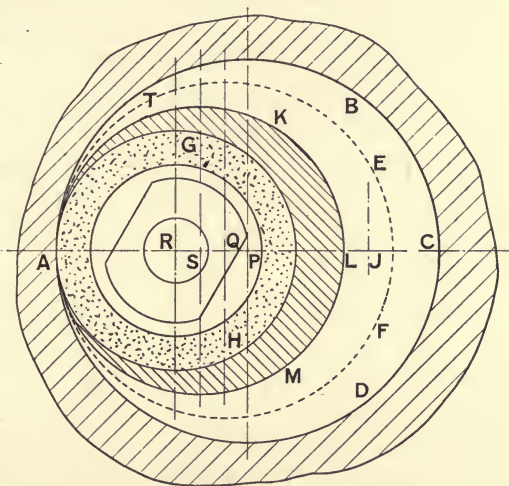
ARRANGEMENT OF GUEST ECCENTRIC SLEEVE
